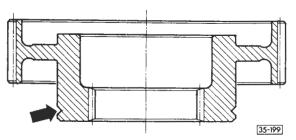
Thicker 1st/2nd gear synchronizer hub with identification groove (arrow).
